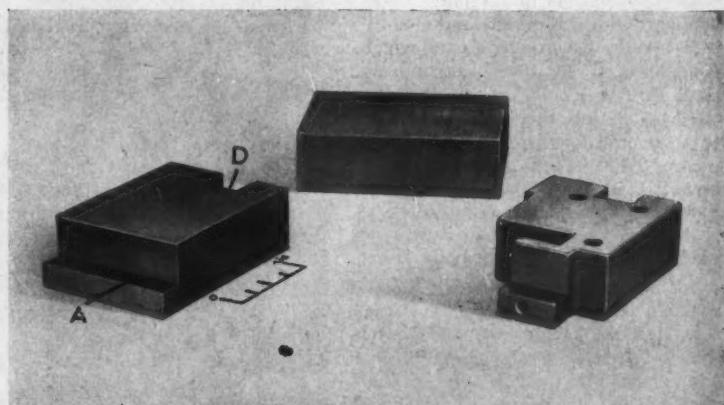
A blank for a knife block is seen in the centre, and a finished component at the right. At the left is a blank after the first two milling stages in the production sequence have been completed
